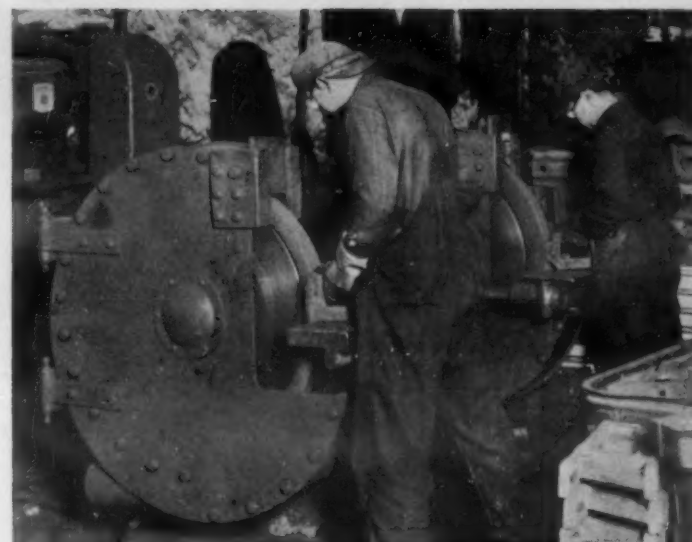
Double-End Floorstand with Segmental Vitrified Wheels Designed to Run at High Speed
